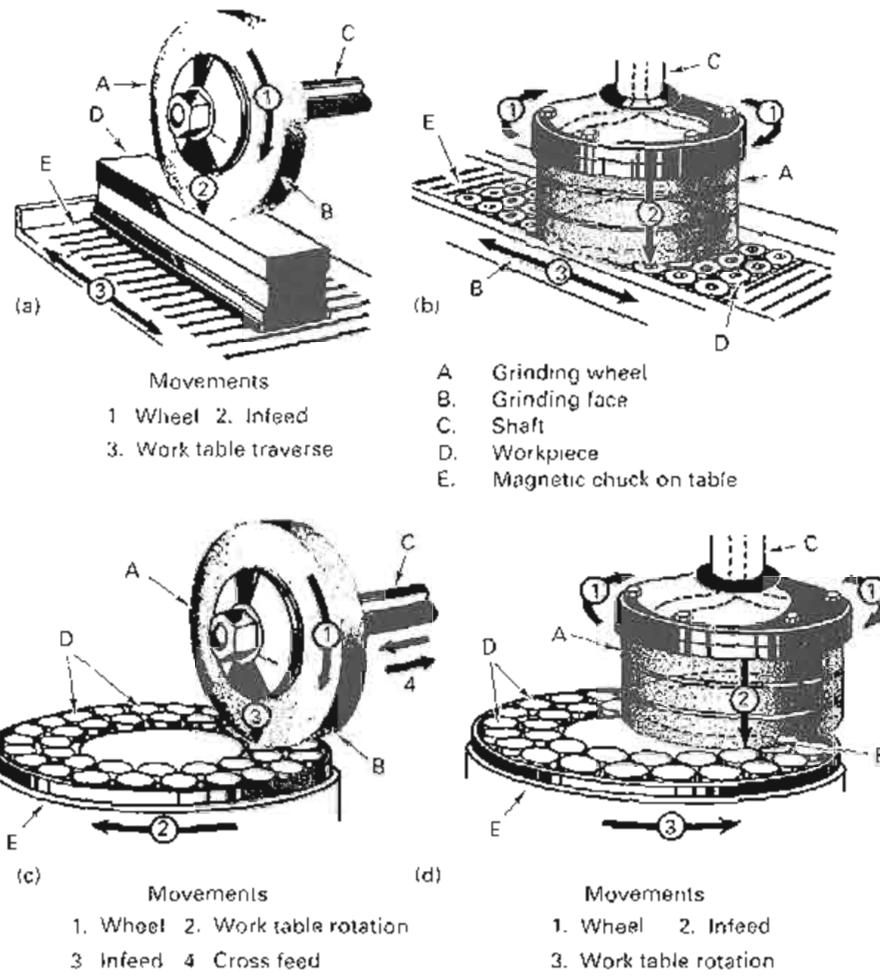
Surface grinding: (a) horizontal surface grinding and reciprocating table; (b) vertical spindle with reciprocating table; (c) and (d) both horizontal- and vertical-spindle machines can have rotary tables. (Courtesy of Corborundum Company.)
